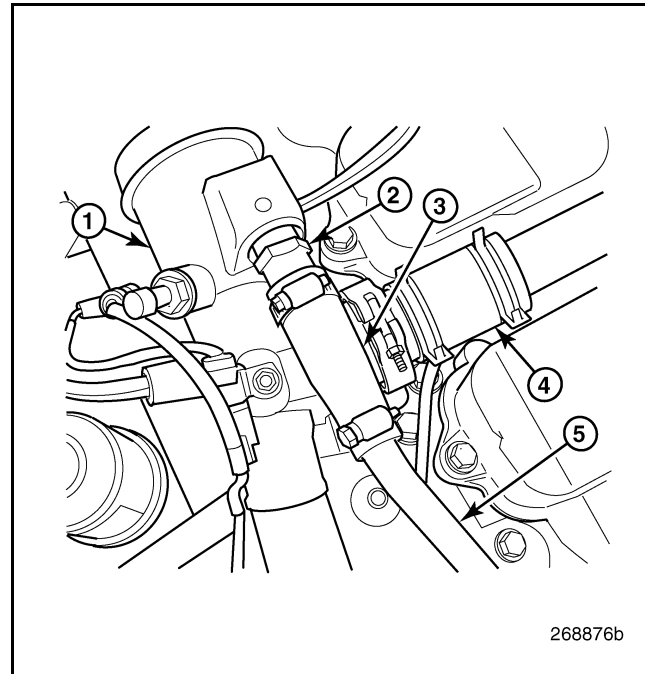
Boost Pressure Relief Valve (Turbo By-Pass)
